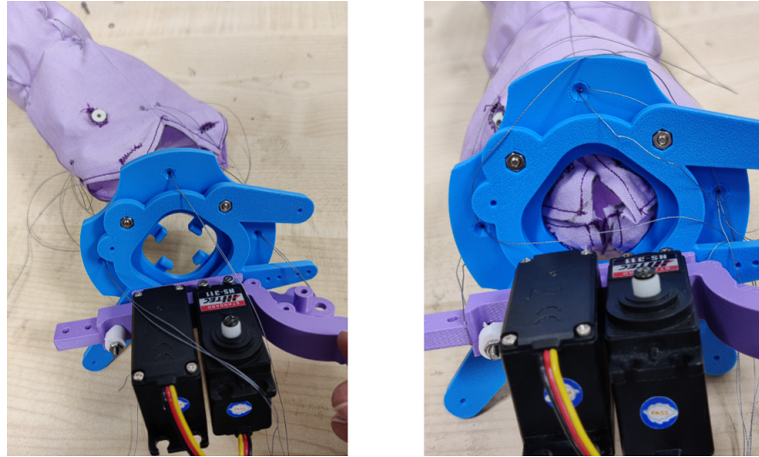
Fabric layer attached to the hooks, with strings being fed through the first layer of routing holes.
